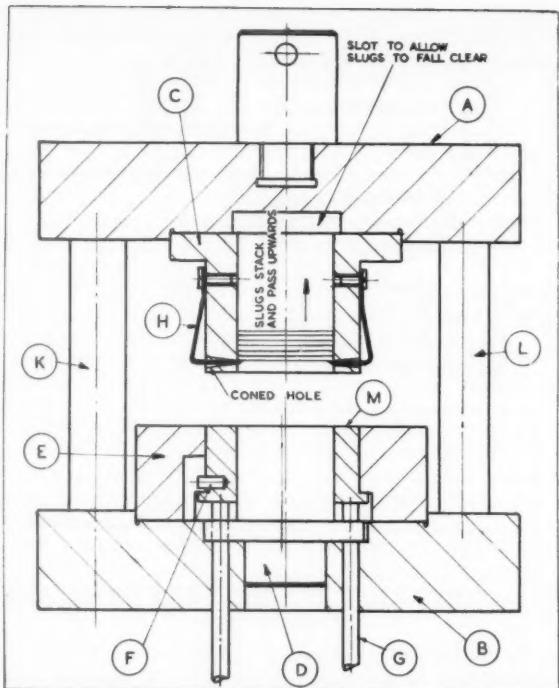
Four wire spring pins evenly spaced round the top blanking punch are sufficient to hold a stack of slugs until they pass out of the slot machined in the top bolster
